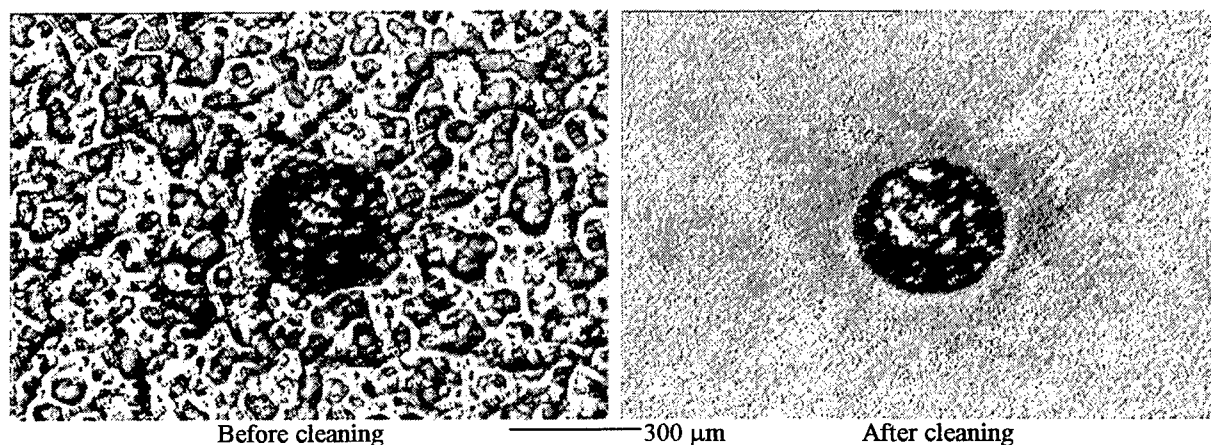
The typical optical micrographs of PCB before and after laser cleaning
